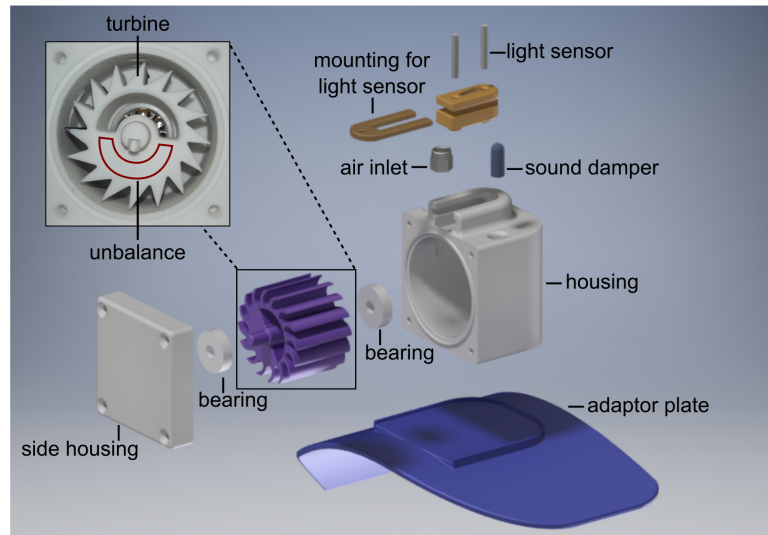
CAD explosive view of turbine model V_4 . All components are shown, except for four screws, which attach the side housing to the main housing. Top left: Photograph of the turbine with the unbalance delineated in red.
